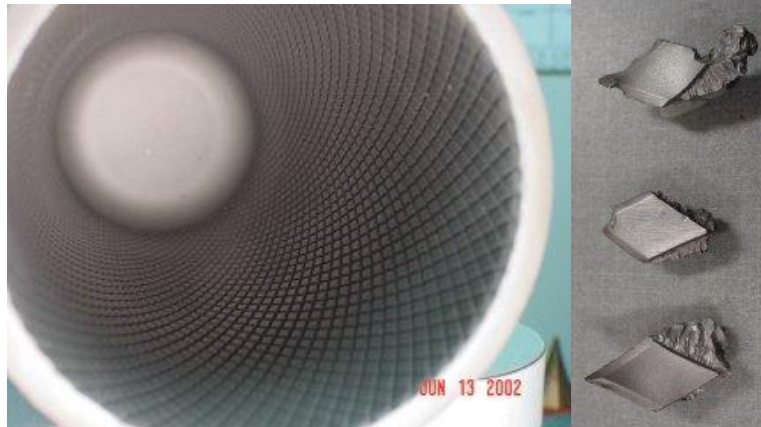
Example of the CastFrag technology (image courtesy of Miltec Machining Inc)
